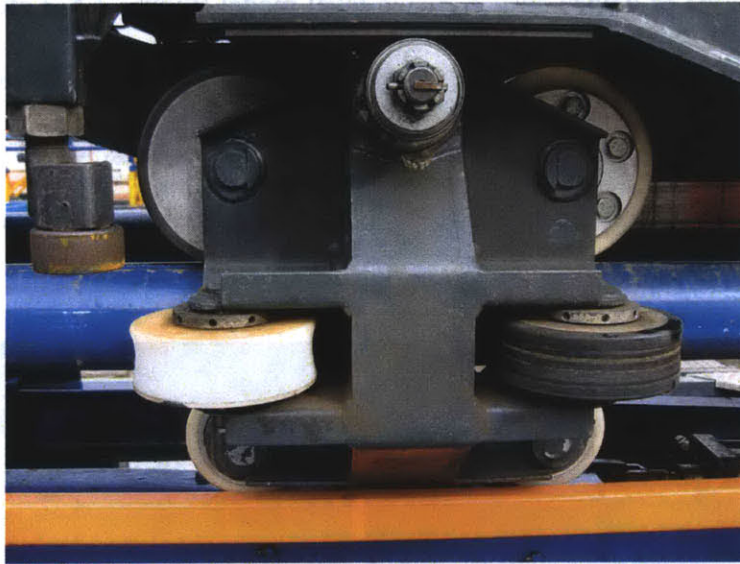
Roller coaster type bearing design would require 6 to 8 rollers to constrain bearing motion properly [<http://en.wikipedia.org>].
